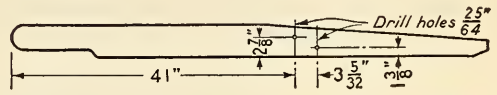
Special holes required in "board for the outer divider, upper," Massey-Harris corn binder
